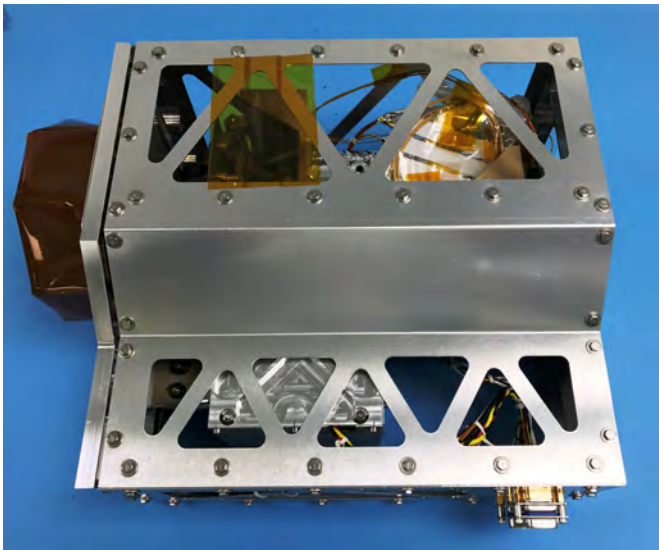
FM HTA - 2. This figure shows the harpoon target assembly (HTA) from the left side.
